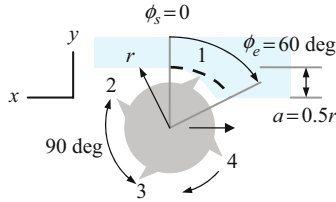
25% radial immersion up milling cutting forces for Ex. 4.1.2
